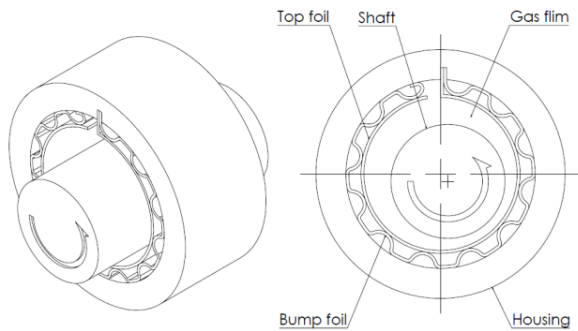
3-D projective and 2-D schematics of bump-type GFB; main parts including top foil, bump foil, shaft and housing with circular arrow indicating the shaft rotational direction
